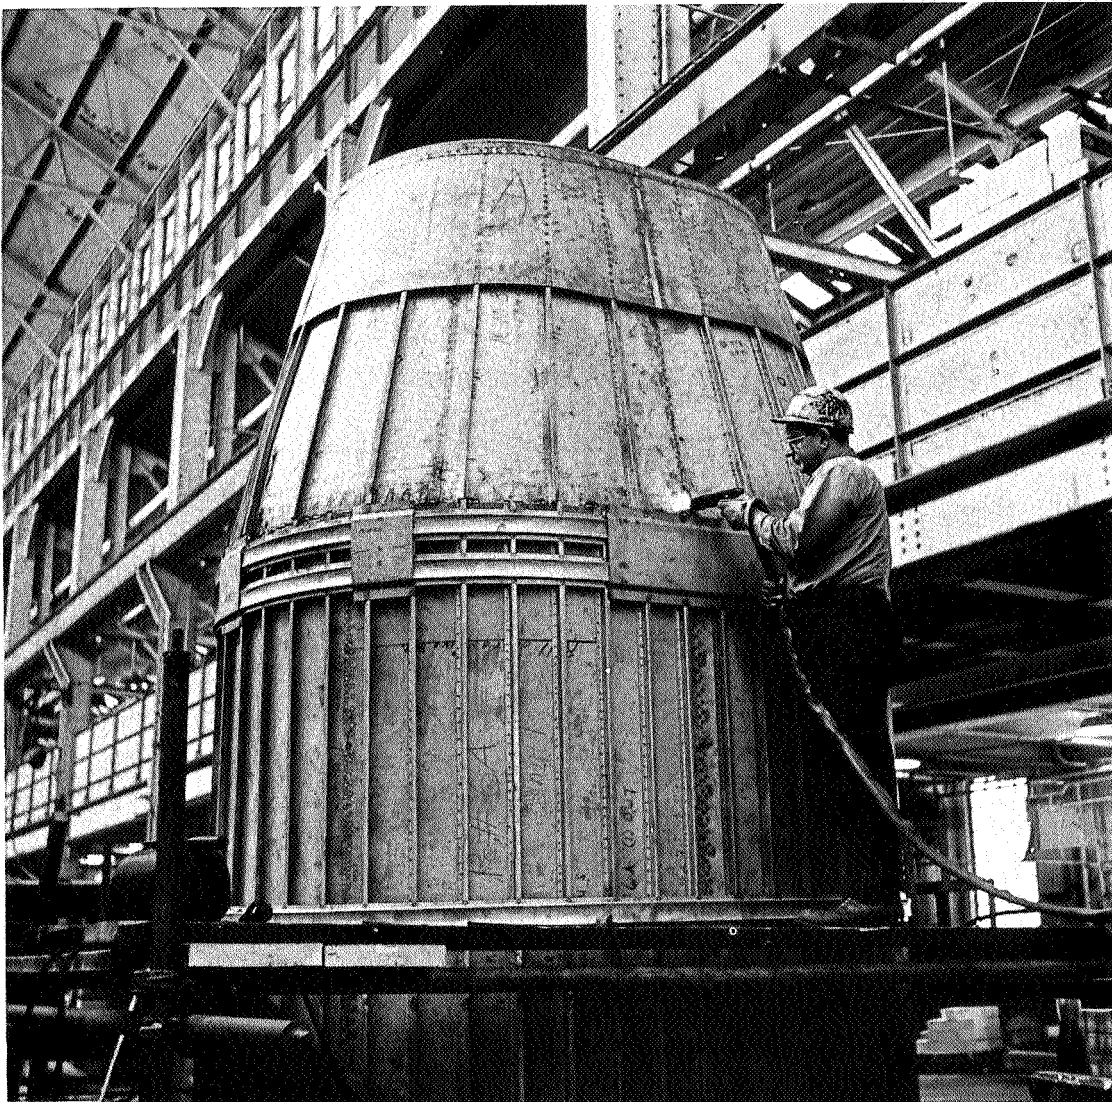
GIA SPOT WELDING STIFFENERS TO STAINLESS STEEL DESTROYER STACK
